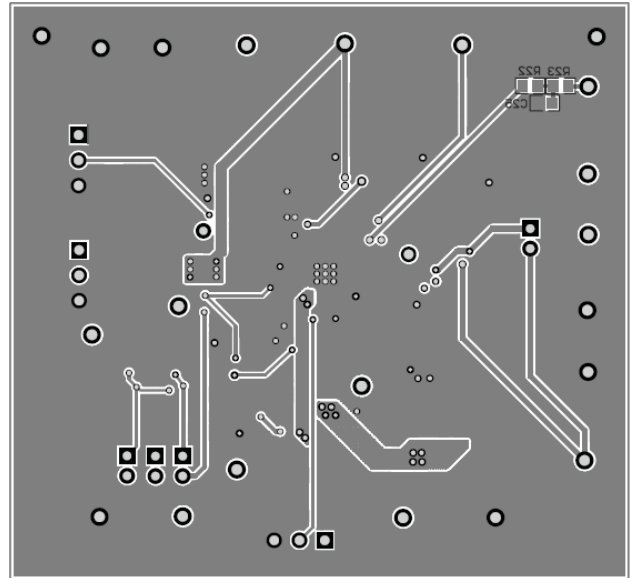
AAT28XXIBK Evaluation Board Bottom Side Layout.
